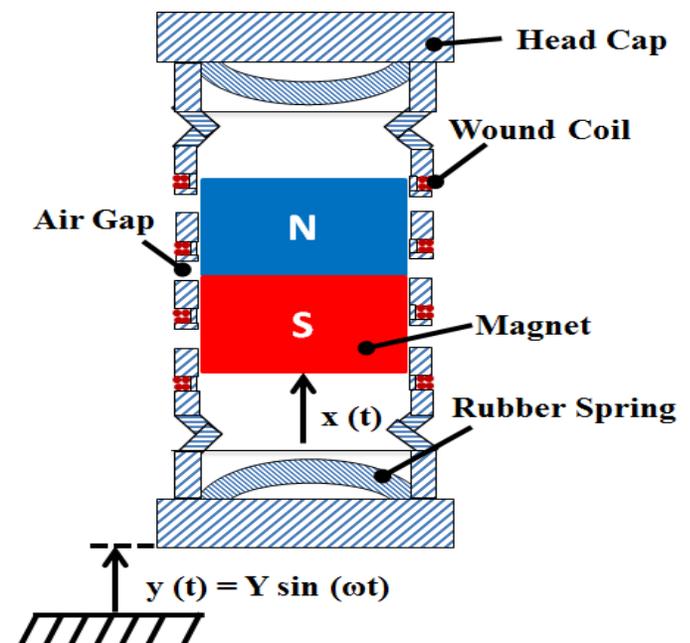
Cross-sectional view of developed electromagnetic energy harvester
